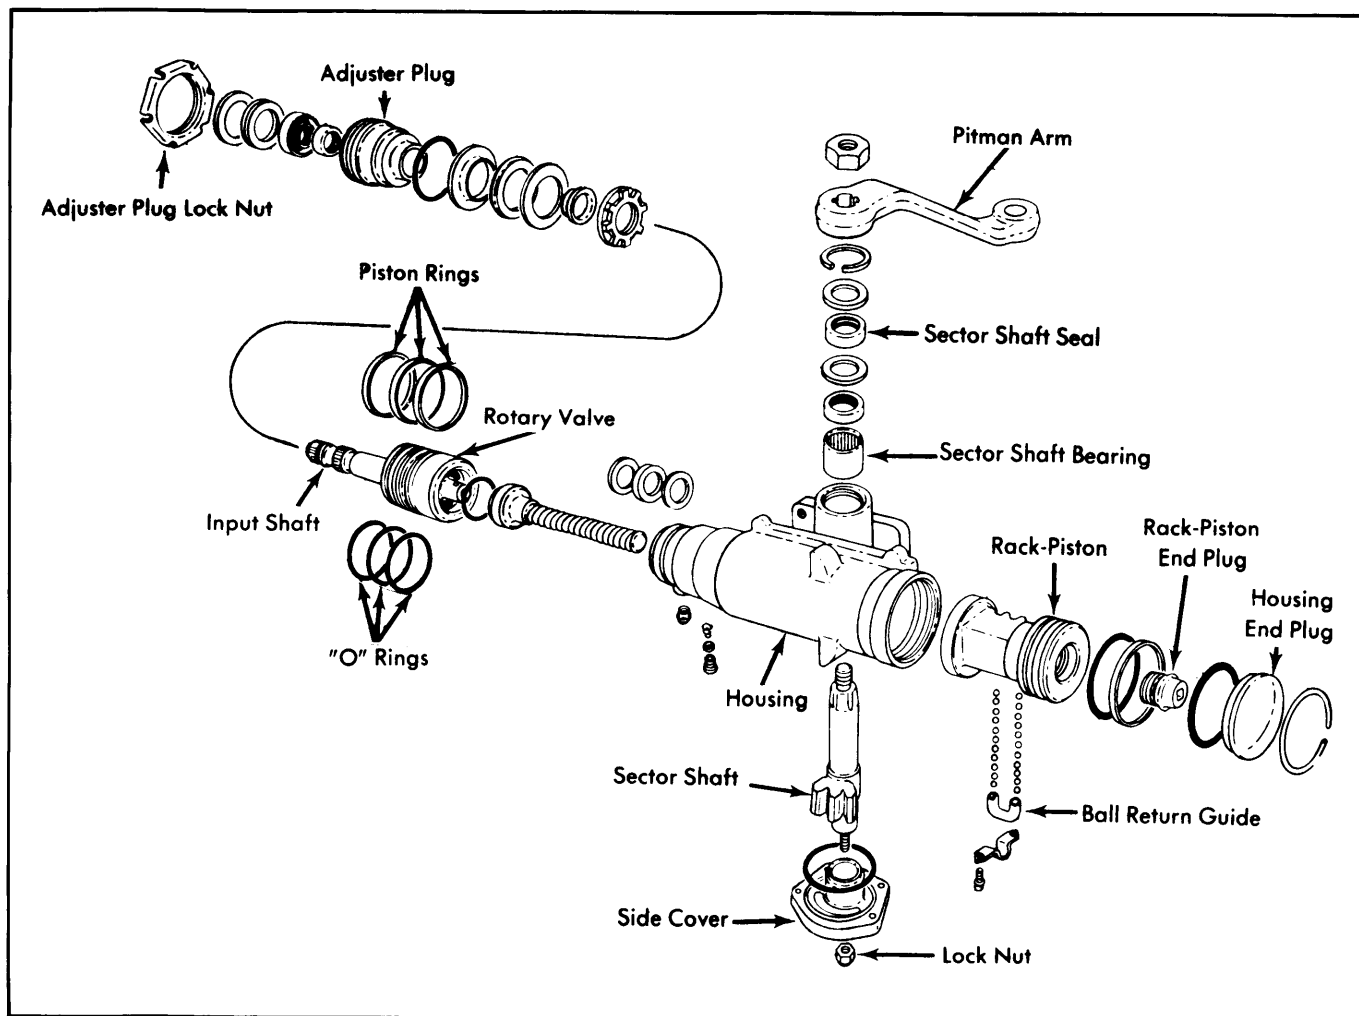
Disassembled View of Saginaw Power Steering Gear (International Harvester is Model Shown)
